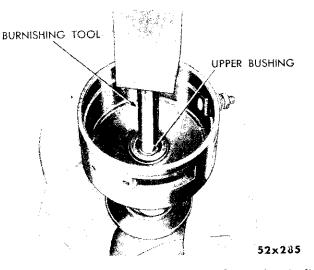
Burnishing Drive Shaft Bushings (Typical)
